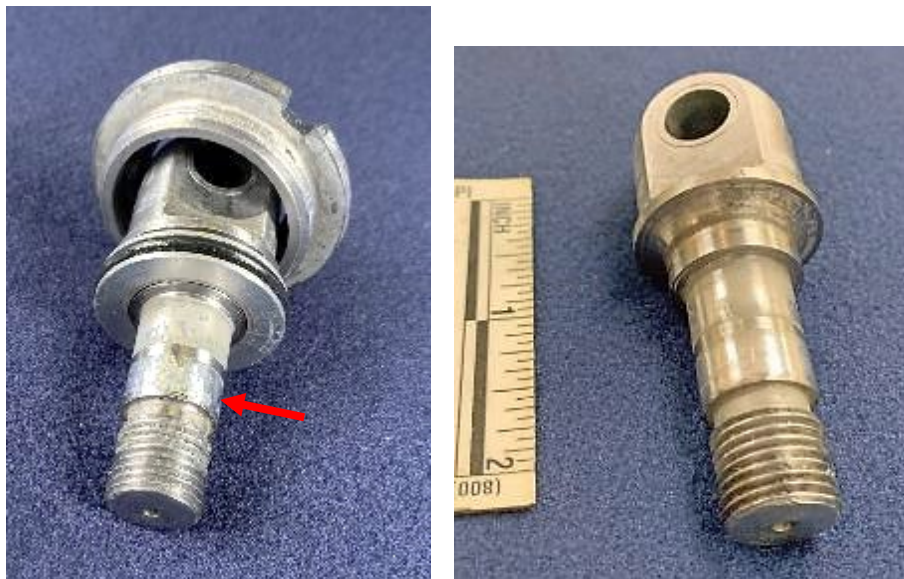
Left photograph shows a partially disassembled eye bolt with moisture seal. Right photograph shows an exposed eye bolt. During reassembly exercises at the NTSB Materials Laboratory, the shank in the area that corresponded to the lower bearing, indicated by an arrow, was ground with a file (to facilitate reassembly).
